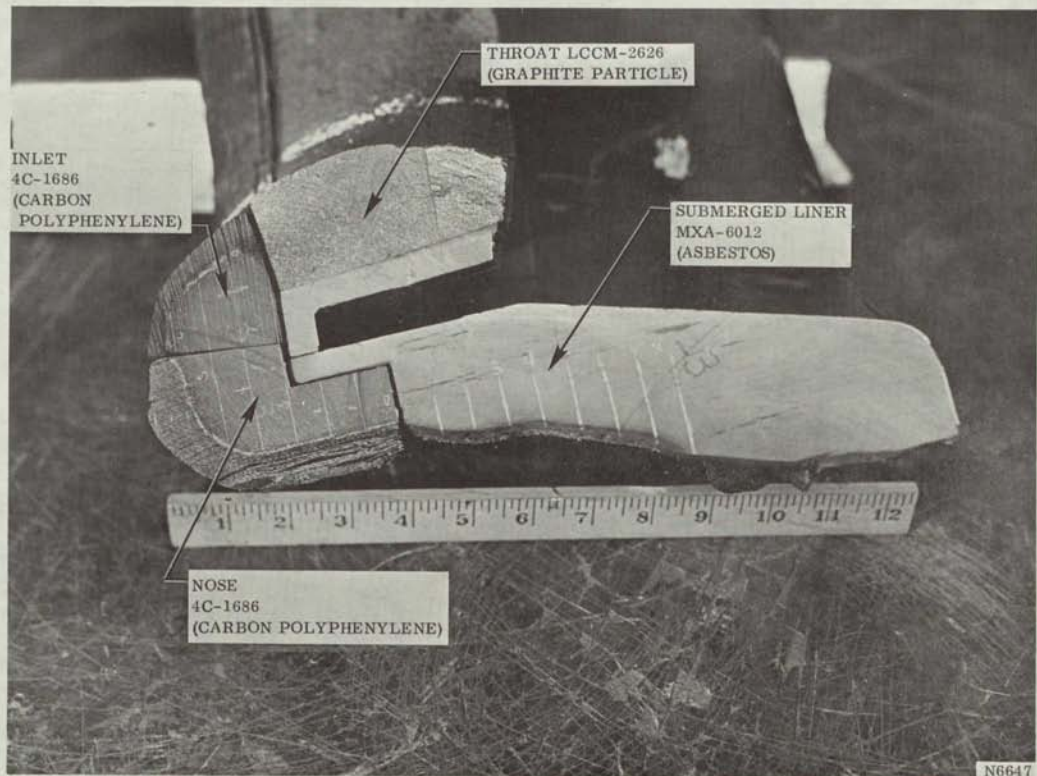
Sectioned Nozzle No. 2 Submerged Liners
